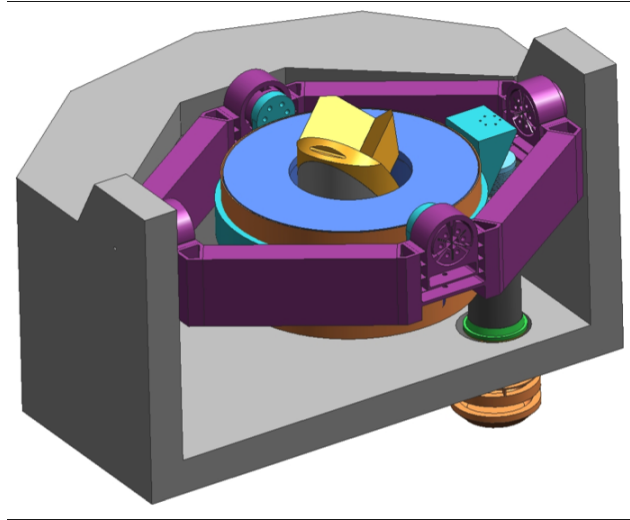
CAD drawing of the Siderostat assembly. The design is still in progress and will be finished by the end of 2009.
